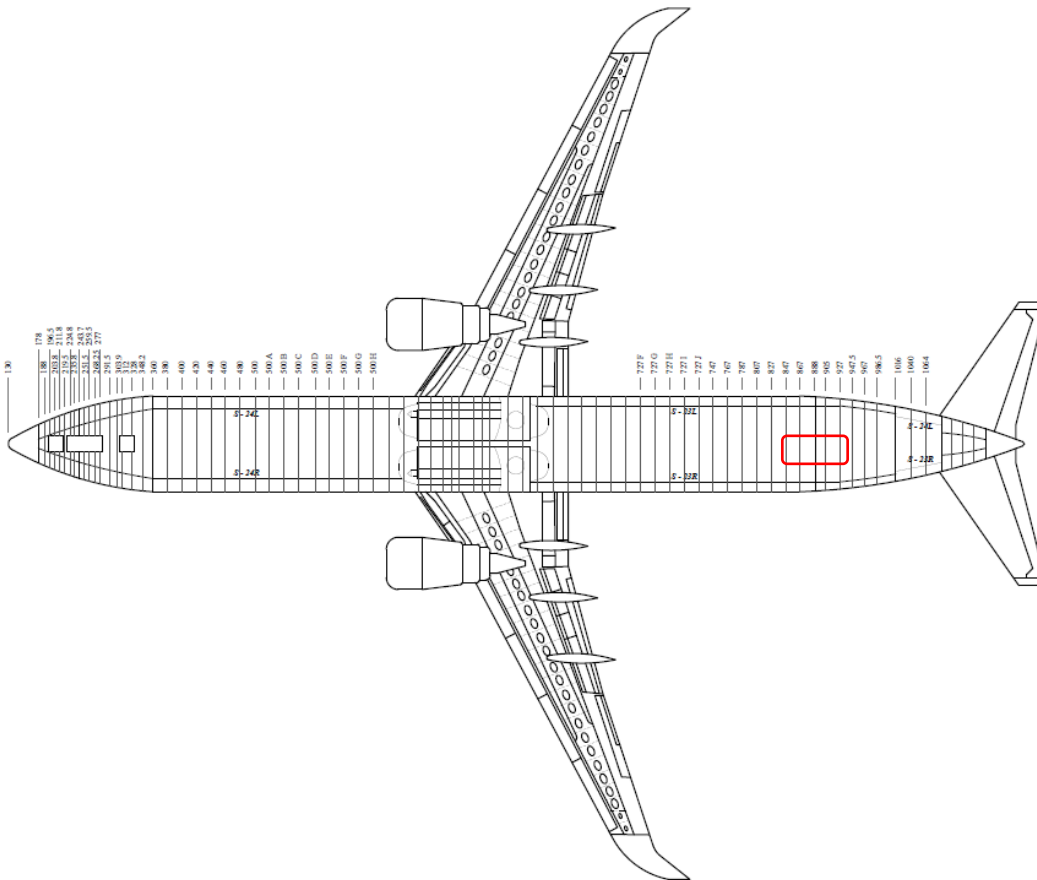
Damage location on lower surface drawing global view (red-highlighted)
